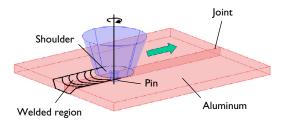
Two aluminum plates being joined by friction stir welding.
